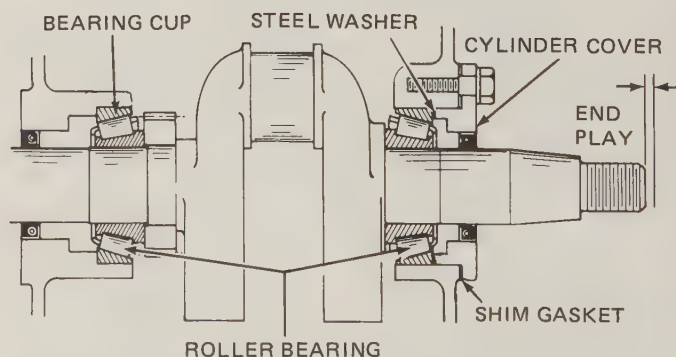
Crankshaft mounted on tapered roller bearings. (Tecumseh Products Company)
